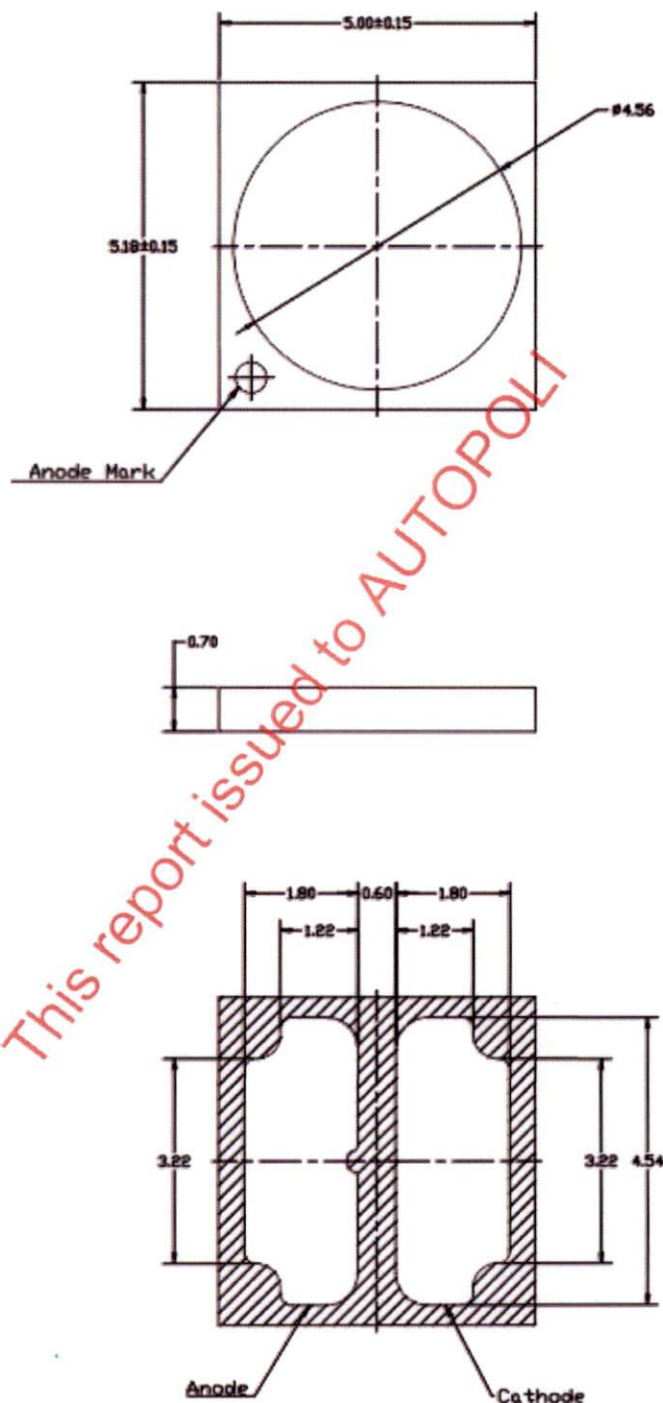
Mechanical drawings for the LUXEON 5050 (all dimensions in millimeters).
